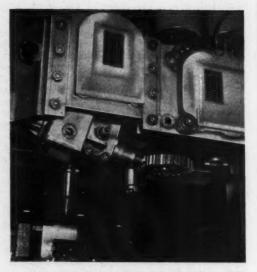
This view shows the two heads on the rear of the cross-rail of the special Milwaukee machine. The inclined spindle head on the left has independent vertical adjustment and provides for milling an undercut form on the work
